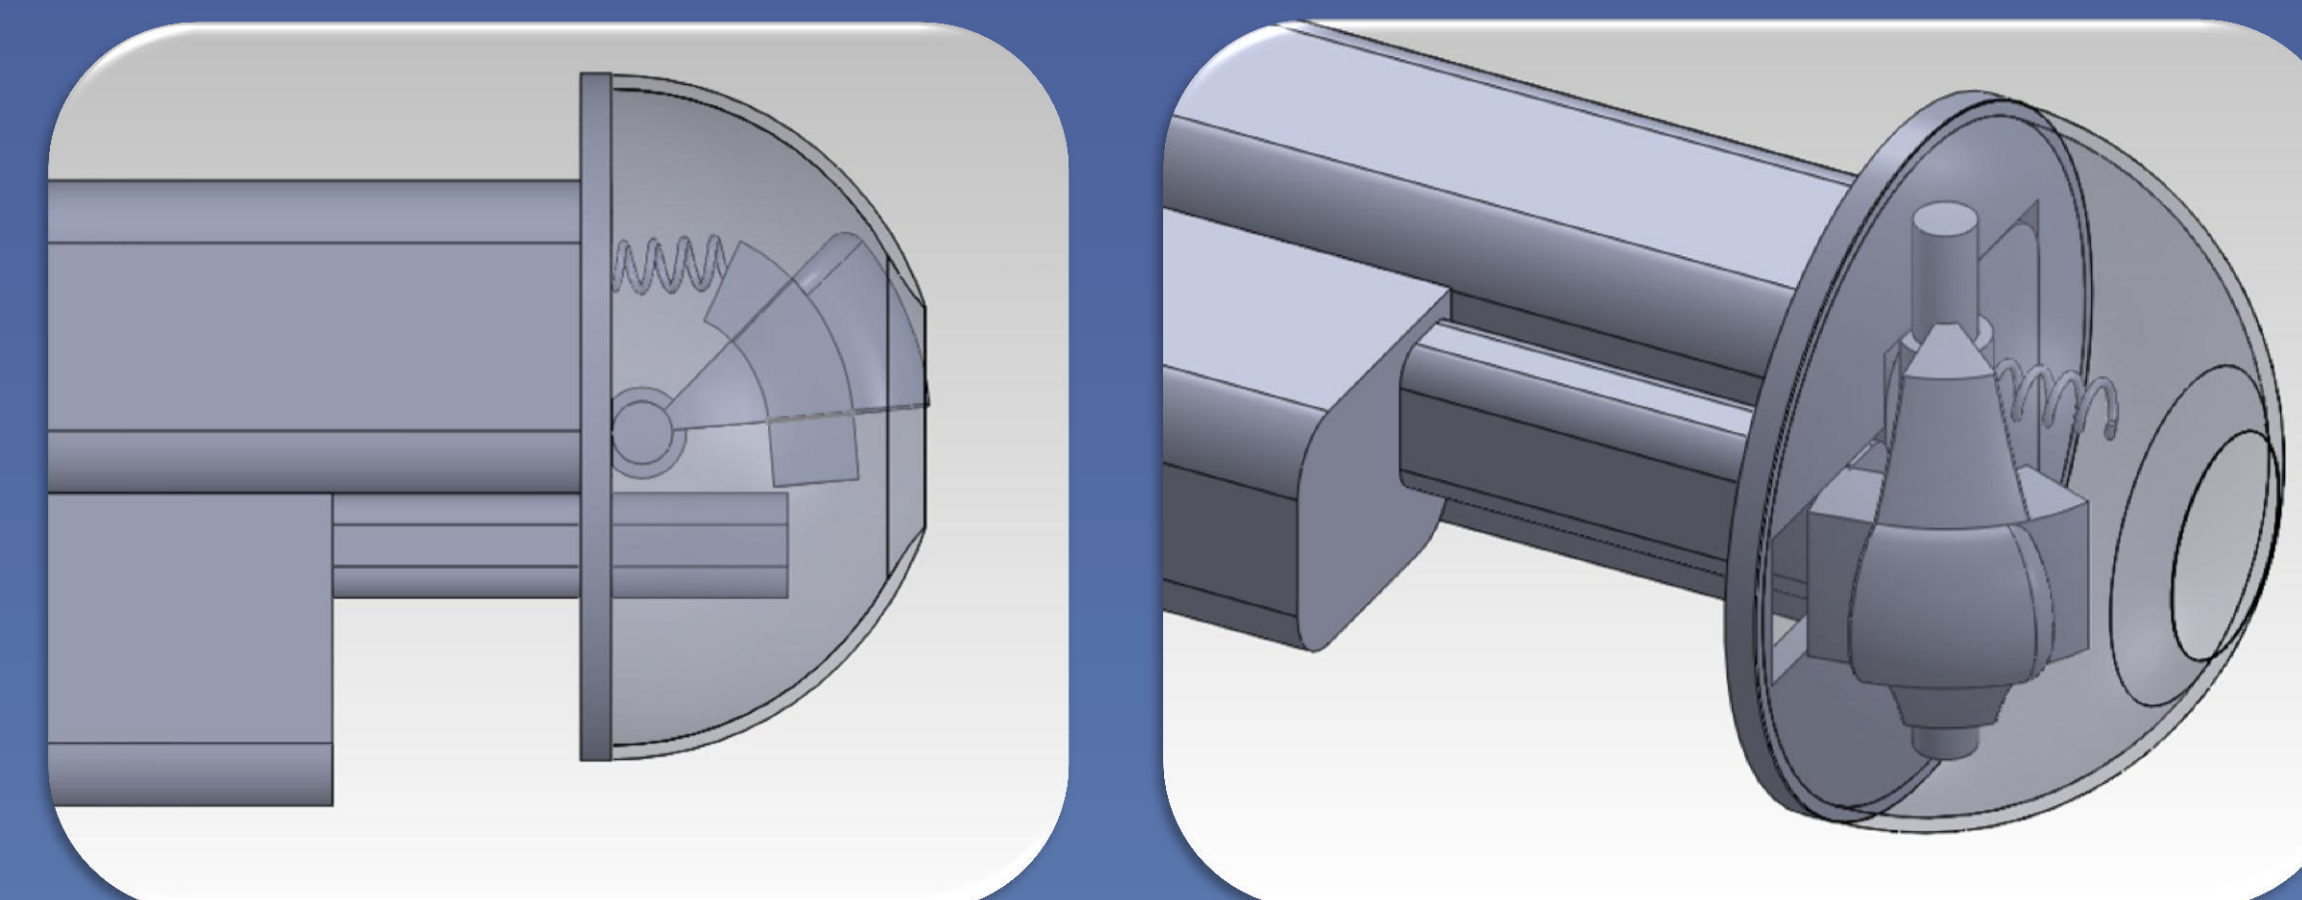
Top view (left) and right view (right) of the tip of the spring design
